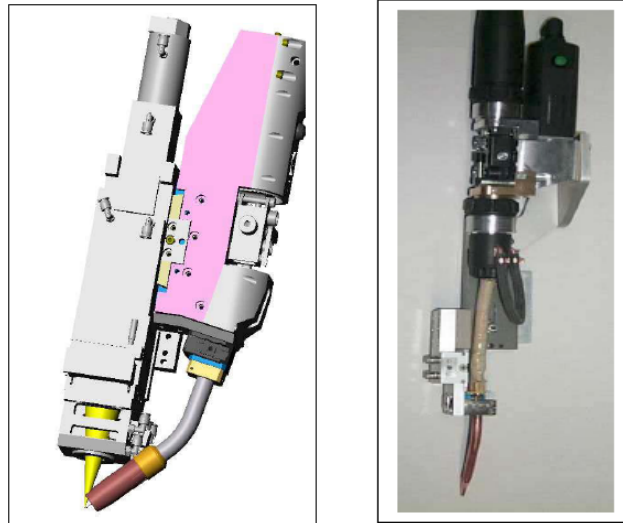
Laser-MIG/MAG welding process
